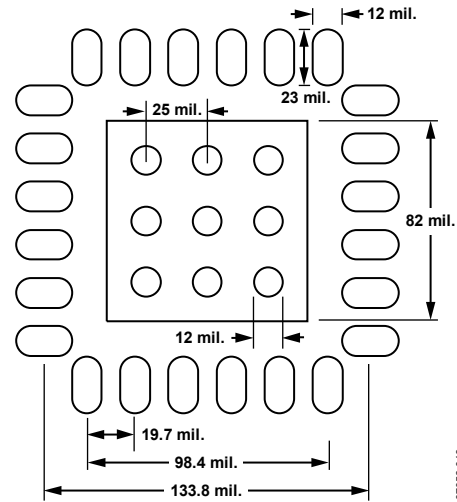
Dimensions for Evaluation Board Layout for the ADL5375 Package
